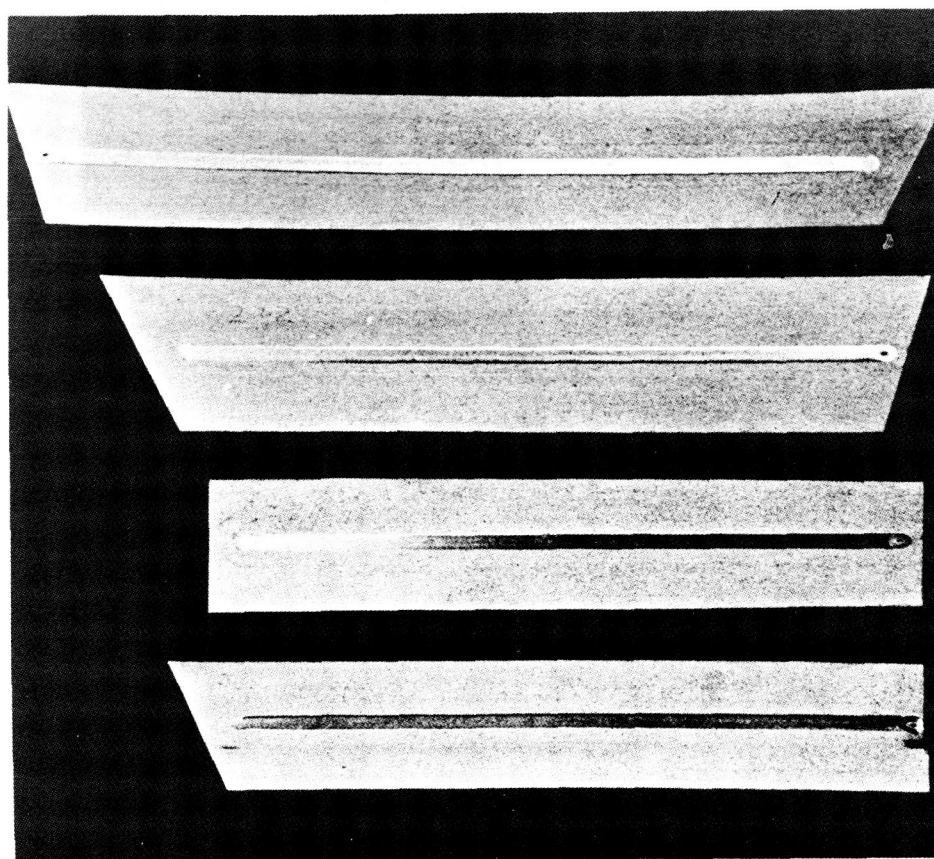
Bead-on-plate GTA welds on 0.030-inch powder metallurgy W-25Re-30Mo alloy sheet.
